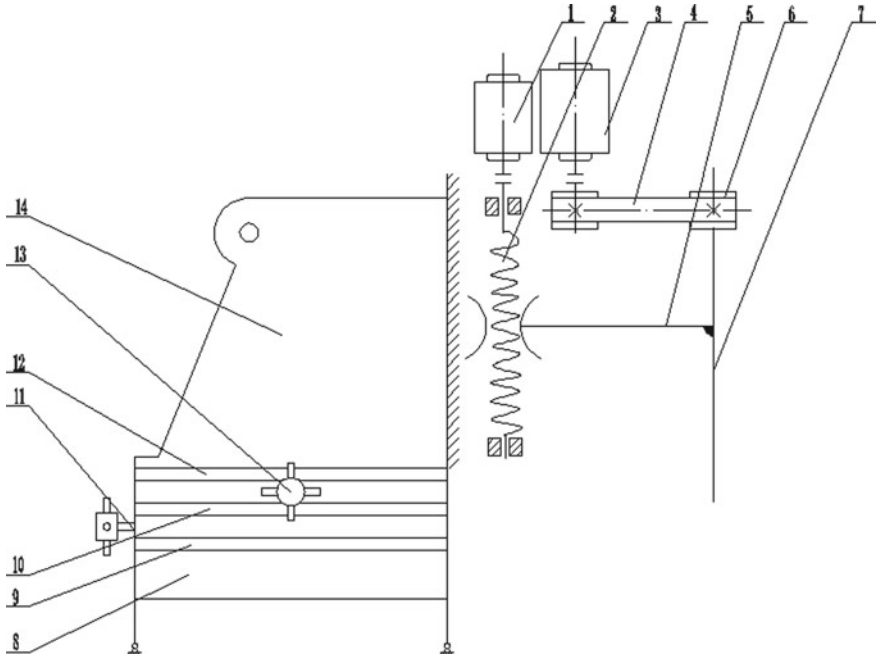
Structure of micro boring machine. Drawing number identification: 1. Stepper motor; 2. Ball screw; 3. Servo motor; 4. Leather strap; 5. Fast feed; 6. Belt pulley; 7. Boring rod; 8. Base; 9. Bottom guide rail; 10. Middle guide rail; 11. Screw rod; 12. Upper guide rail; 13. Hand wheel; 14. Frame
